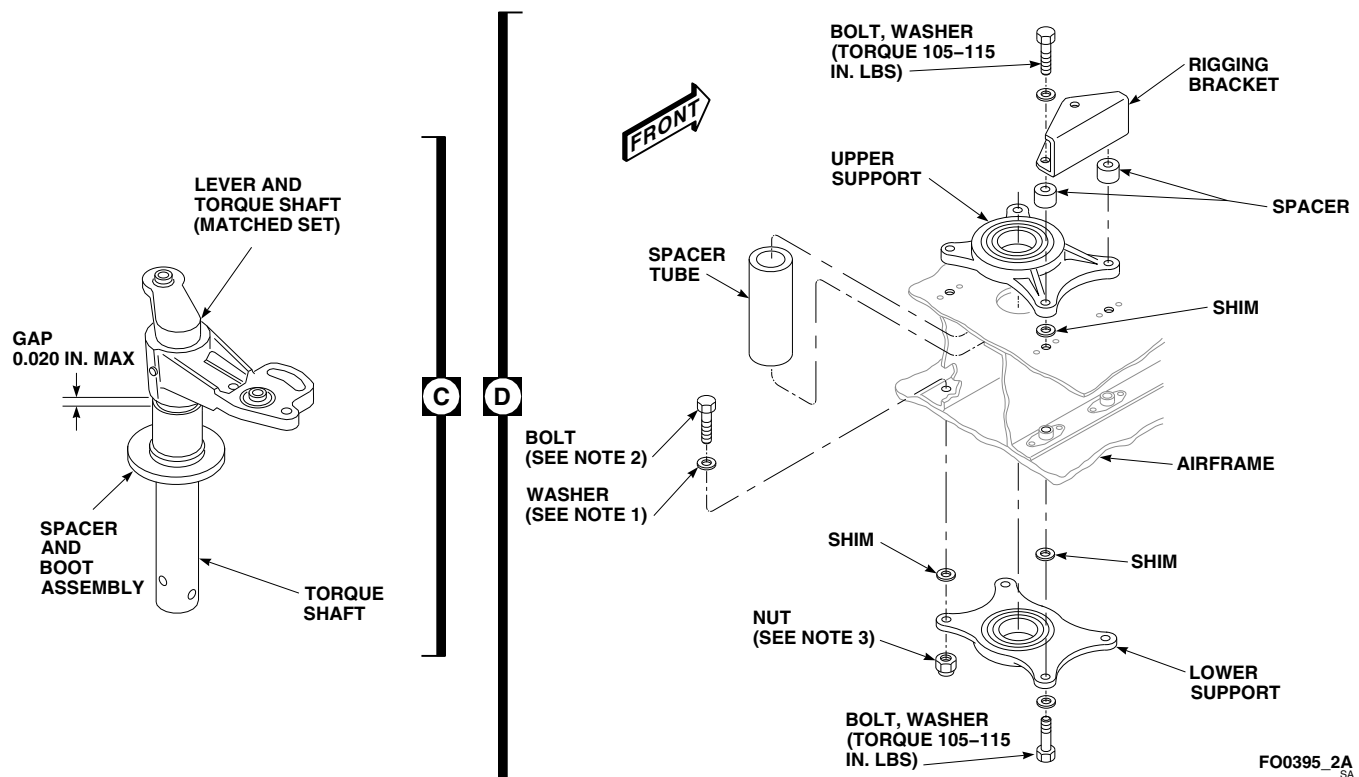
REPLACE YAW TORQUE SHAFT AND LEVERS (SHEET 2 OF 2)
